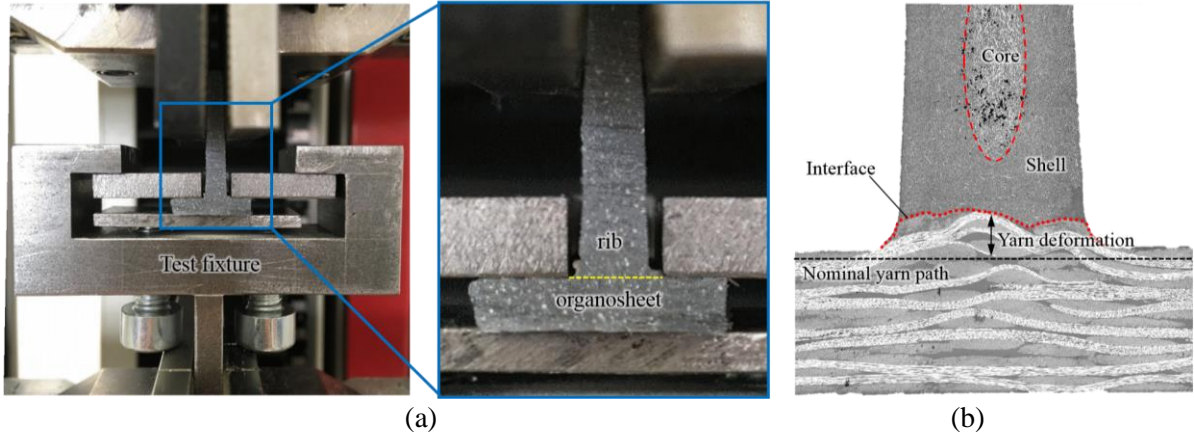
Mechanical specimen mounted in test fixture (a) with isolated interface. Optical micrograph showing key regions of overmoulded ribbed plate cross-section (b).
